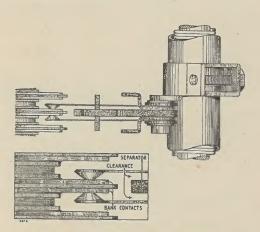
SHOWING WIFER RESTING ON BANK CONTACTS
